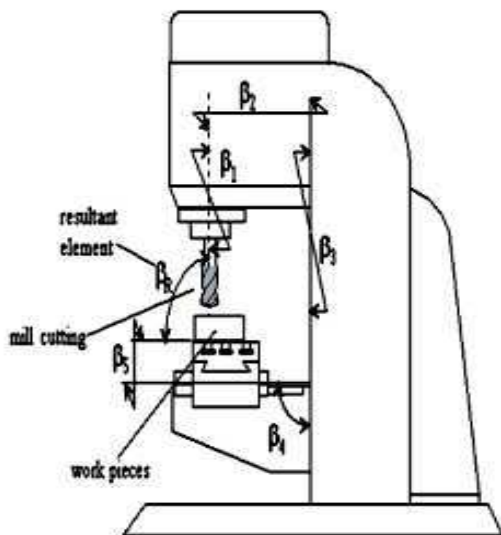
The chain of dimensions from perpendicularity between axle of the mill - cutting and the plan orientating surface
